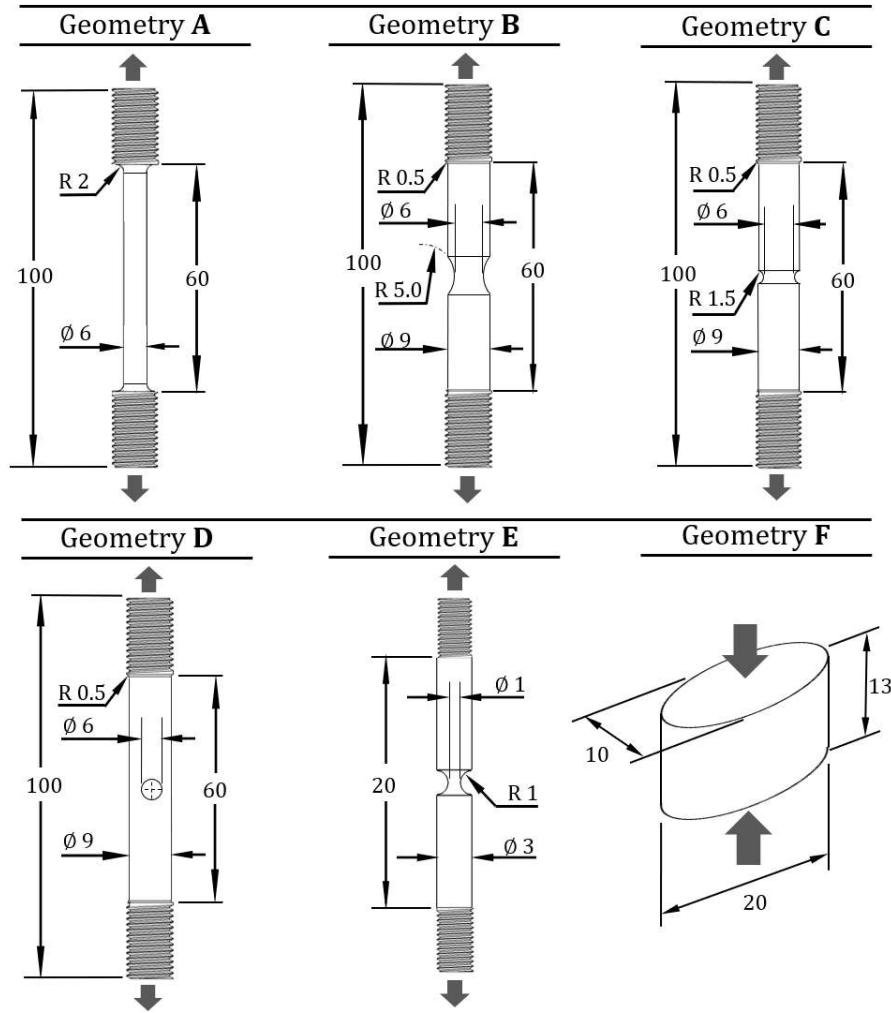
Identification of the 6 test specimen geometries with dimensions in millimetres and applied loading.
